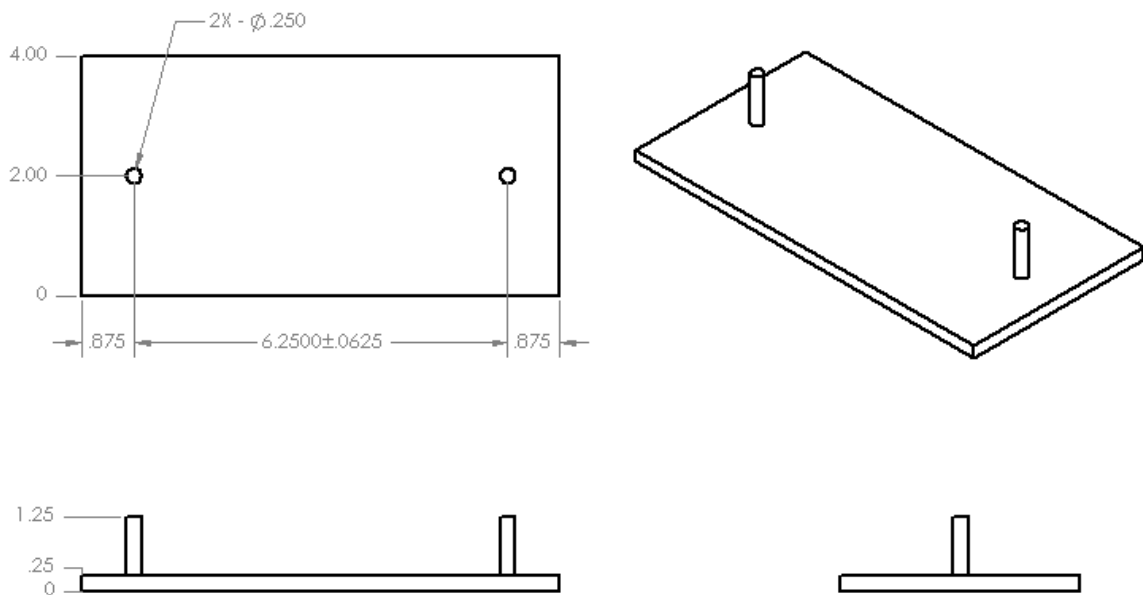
Staging area assembly view from multiple perspectives and dimensioned
